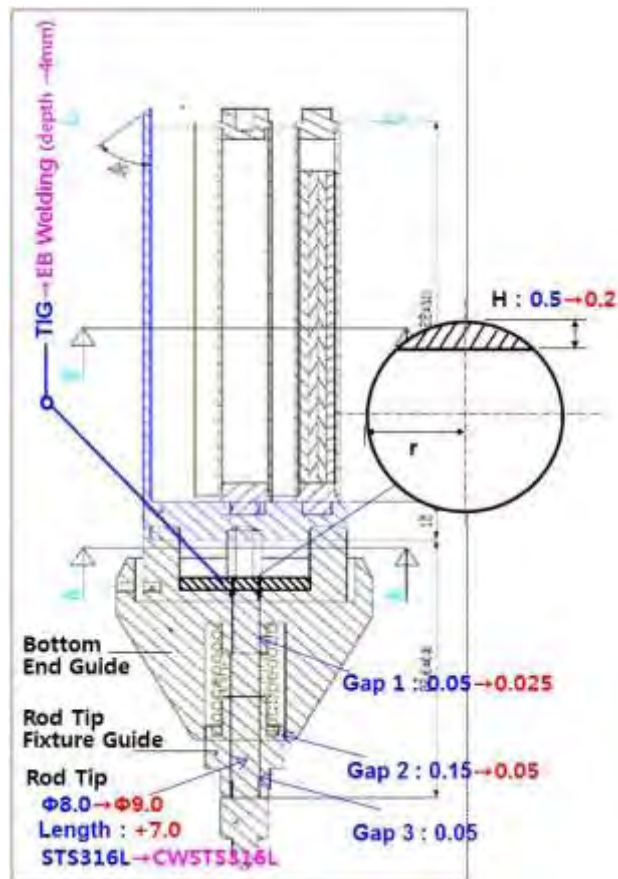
The improved design drawing of the capsule bottom part for 5 dpa irradiation
